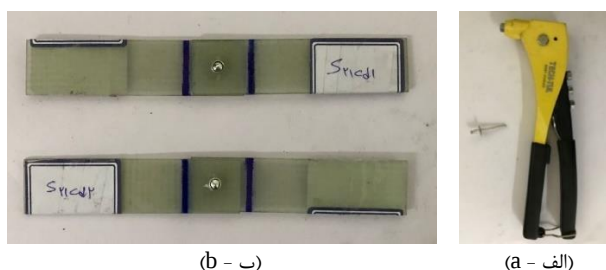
(a) Riveting machine for aluminum rivets, (b) rivet joint
